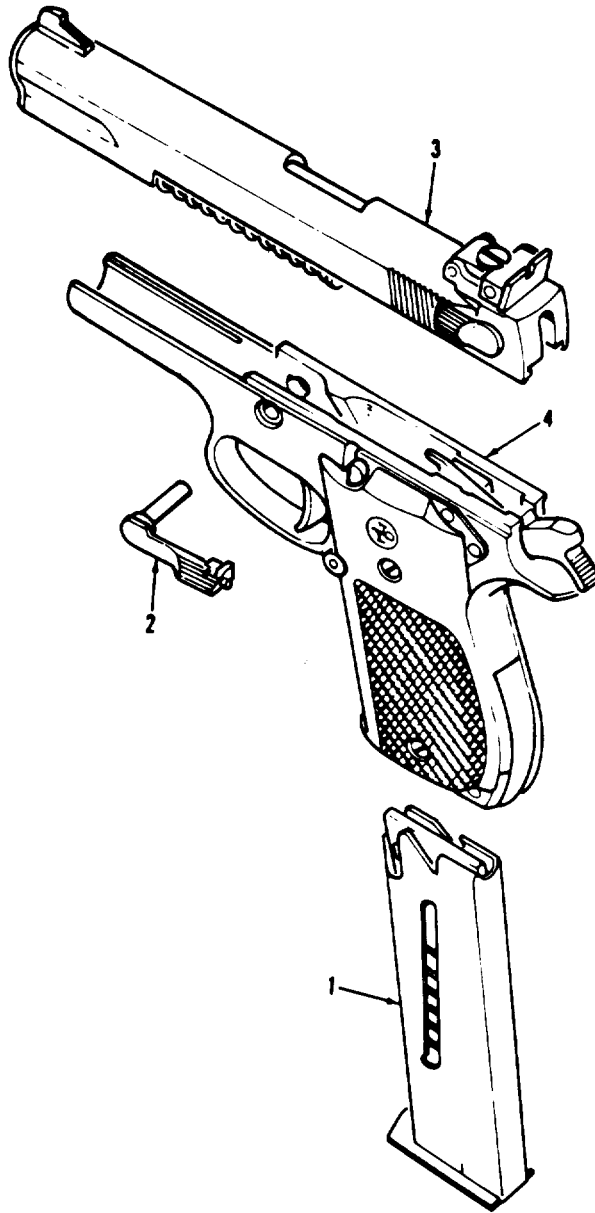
Major groups and assemblies-Model 52 Smith and Wesson cal. .38 automatic pistol-exploded view.
